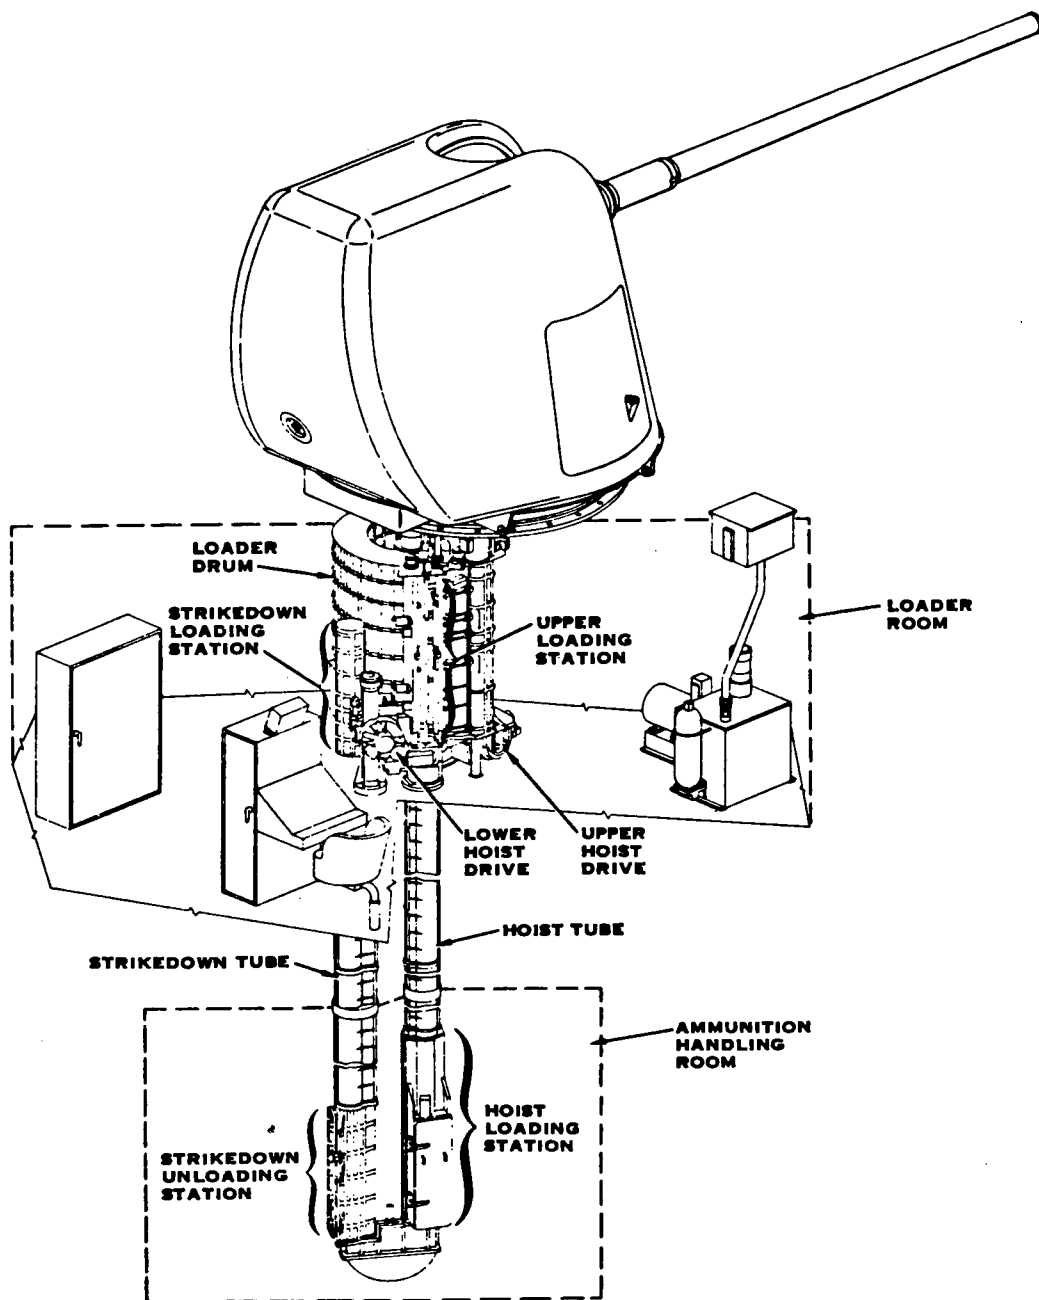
Mark 45 Gun Mount showing the Mark 6 strikedown and hoist tubes
